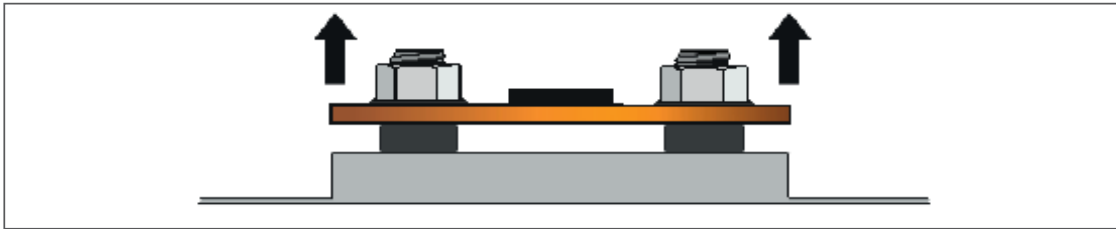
HV SBM_I evo, removing the M8 nuts from the threaded bolts
